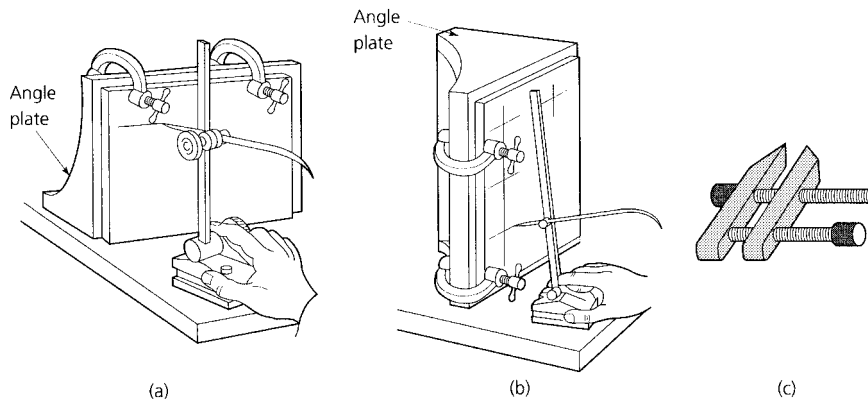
Use of angle plate: (a) to provide mutually perpendicular surfaces; (b) toolmaker's clamp
